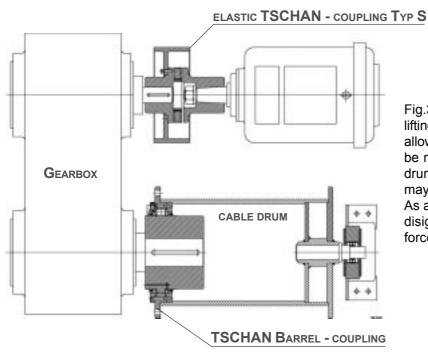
shows the mounting of the barrel coupling in a lifting mechanism. Considering the fact that this coupling allows axial displacement, a self-adjusting bearing must be mounted, fixed laterally, at the opposite end of the drum shaft in order to withstand the axial forces that may be genarated.
